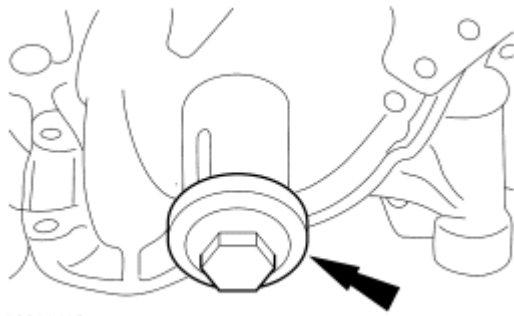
Identifying Special Tools (303-463, 303-464 And 211-185)
